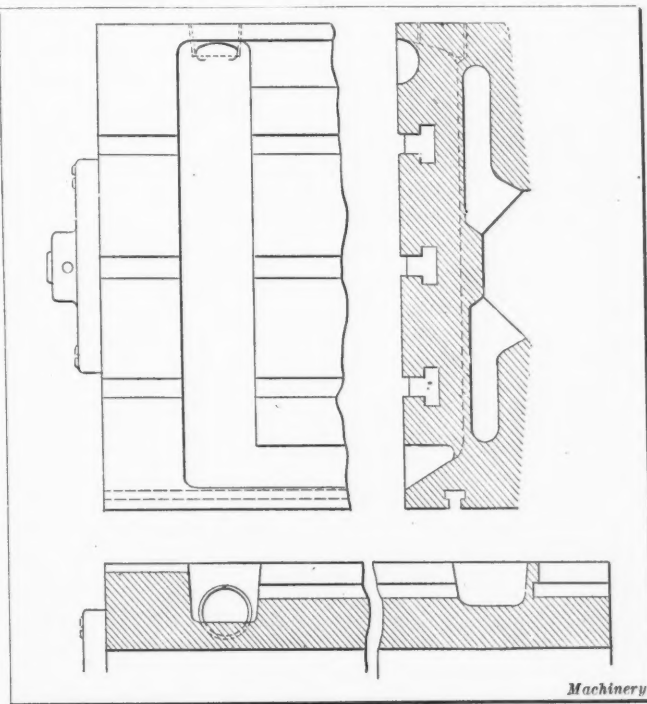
Table with Grooves in Extreme Left-hand End to receive Tongues of Attachments, and Short T-slots cut in Right-hand End
